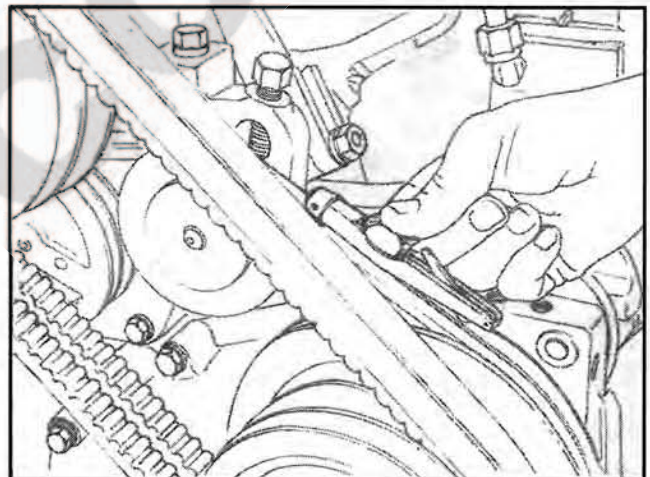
, (OM1014L). Checking belt tension with a Kriket gauge
